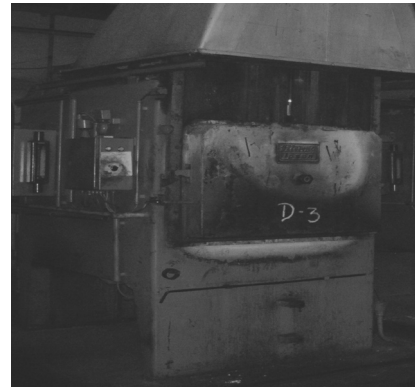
Picture of the workplace covering the universal chamber furnace DLR type
